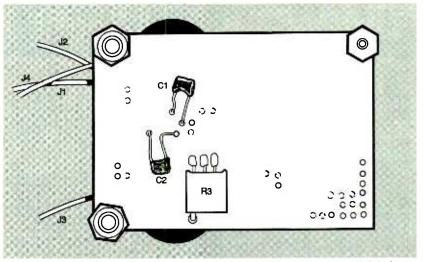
Here is the bottom side of the Conductance Adapter. If you use a slightly larger board, these components can be placed on the top side along with the rest of the components.
